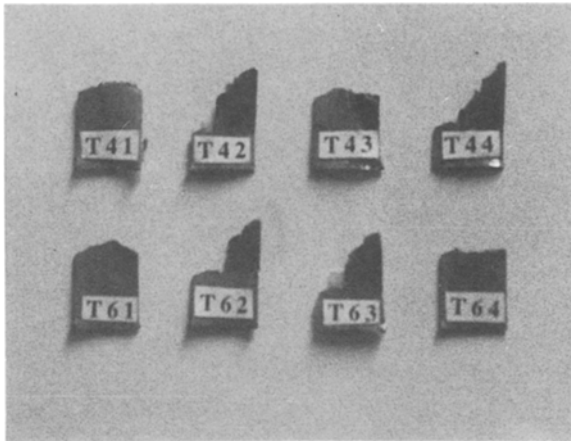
Side fracture surfaces with T4 and T6 treatments.
